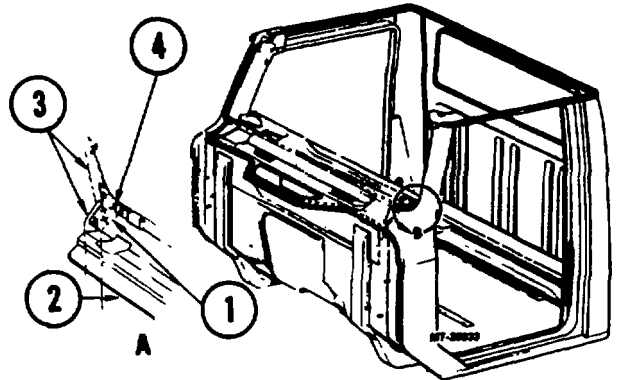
Windshield Side Outer Panel to Cowl Rear Panel and Bracket Spot Welds
